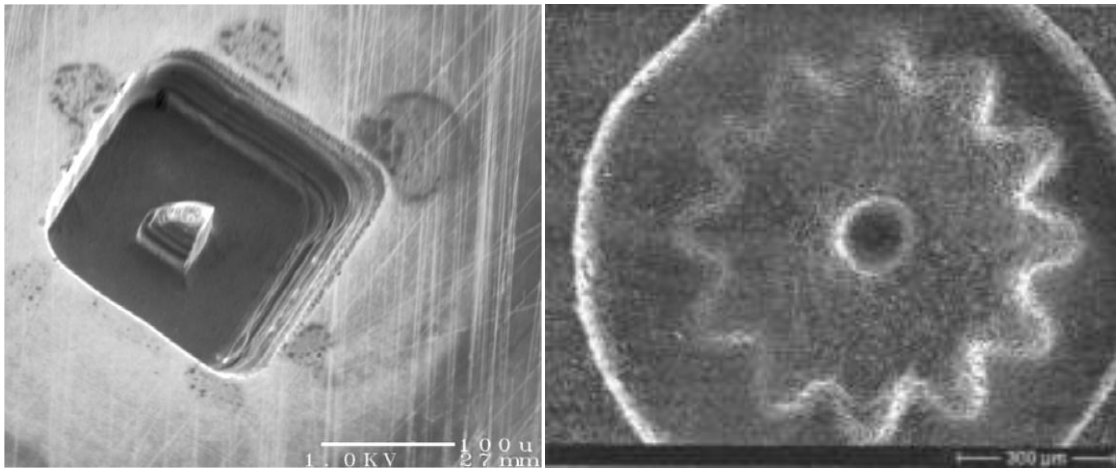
Features machined using micro ultrasonic machining: 3-D cavity [52]
